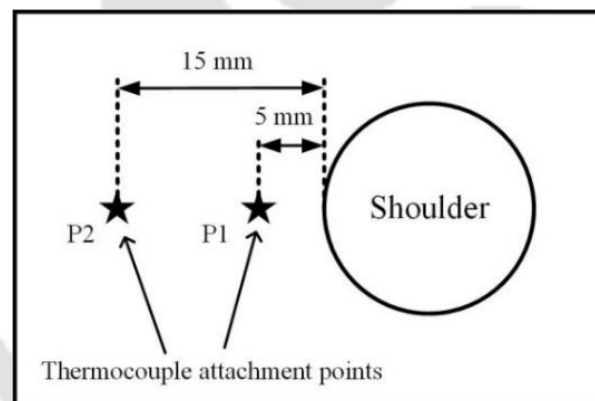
Placement of thermocouples on the top surface of workpiece
